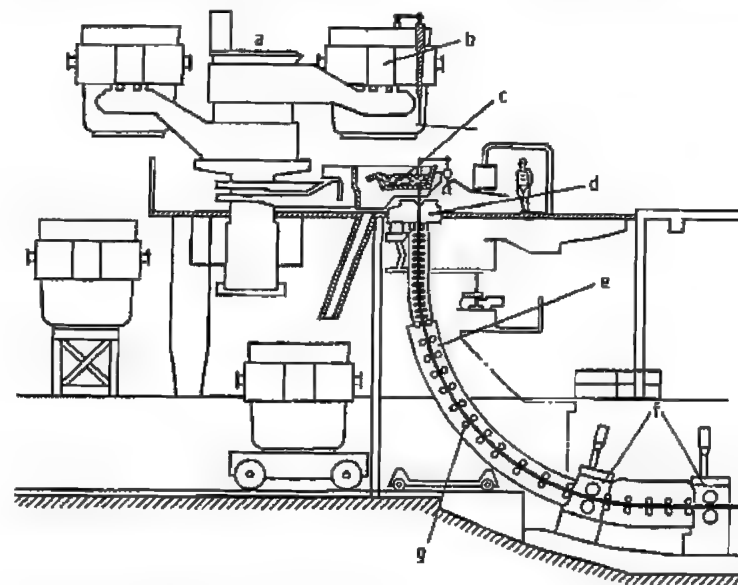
Blown caster with ladle turret: a) Ladle turret; b) Ladle; c) Tundish; d) Mold; e) Secondary cooling zone; f) Straightening and withdrawal; g) Guide rollers.
